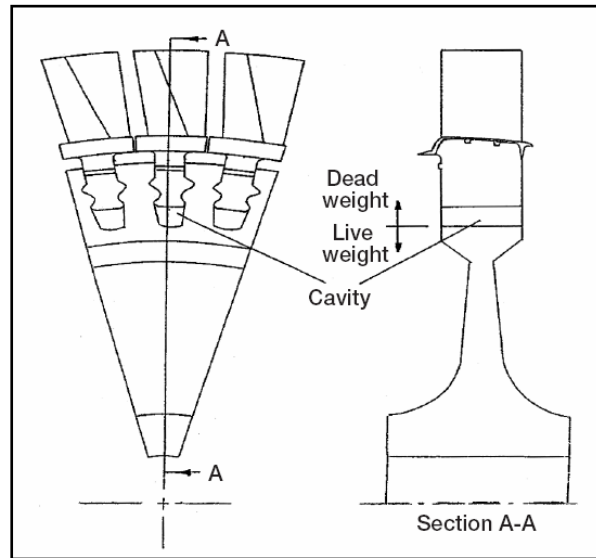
Disk/Blade Assembly. (After Tong et al) [41]
